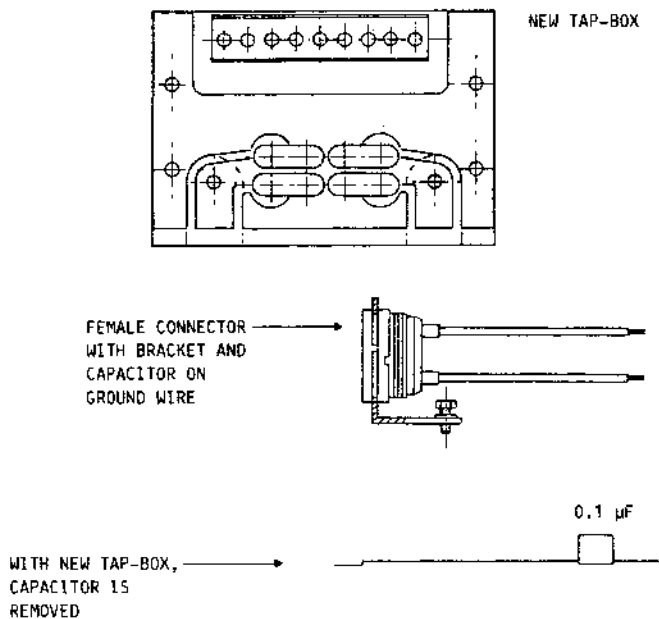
Tap-Box With Capacitor Inserted in Printed Circuit
